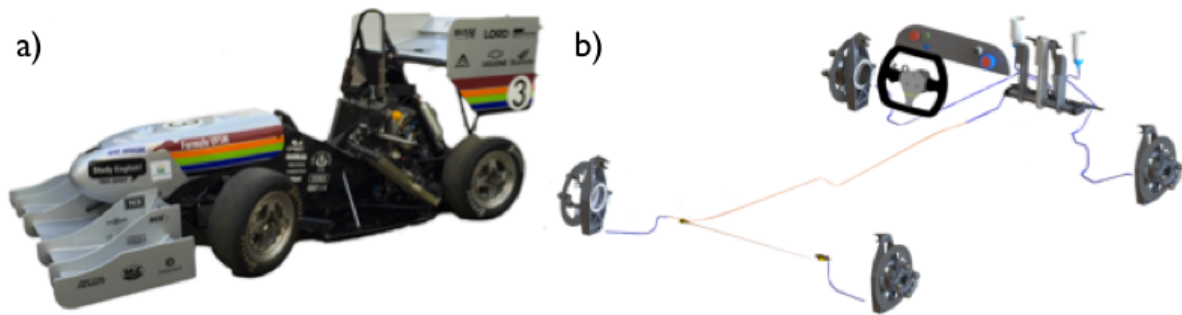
a) Silver Prototype - Formula UFSM team. b) Brake system of the Silver prototype.
